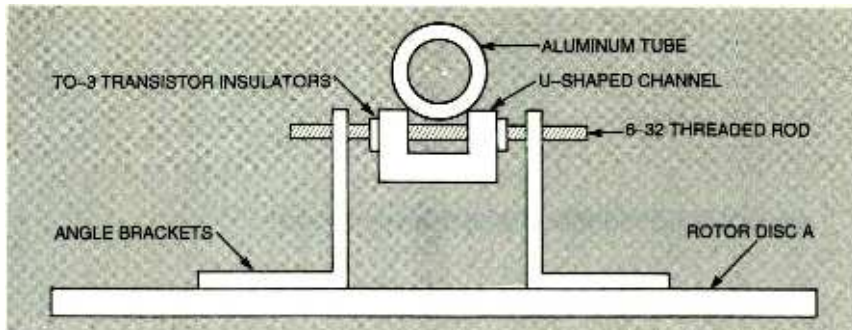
The pivot bearing is simply a threaded rod that runs through an aluminum channel. Nylon screw insulators for a TO-3 transistor act as the actual bearings. Angle brackets support the pivot channel above the upper disc sandwich.
